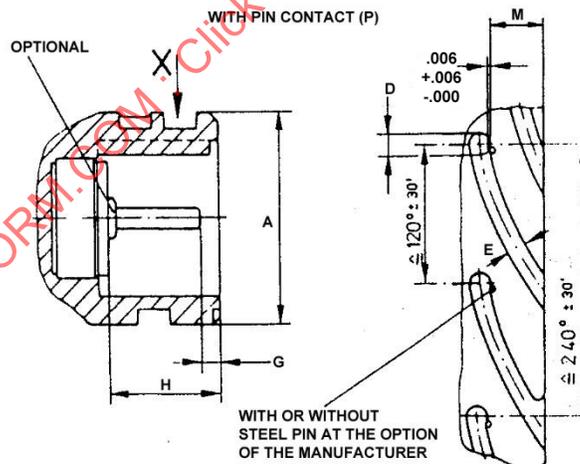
Configuration and dimensions for receptacle connector with pin contact(s)
